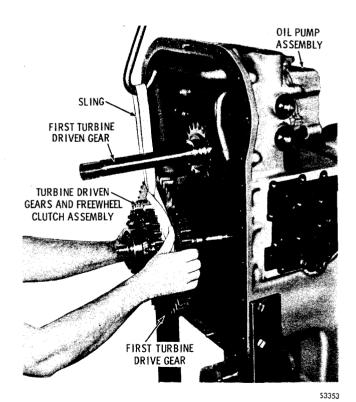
Installing freewheel clutch and turbine driven gears
